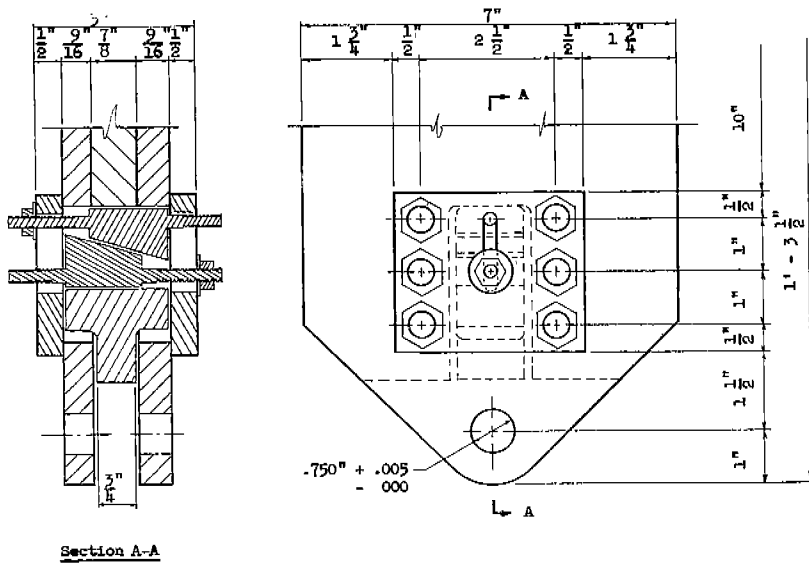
DETAILS OF THE REVERSED-LOAD PULL-HEAD.
